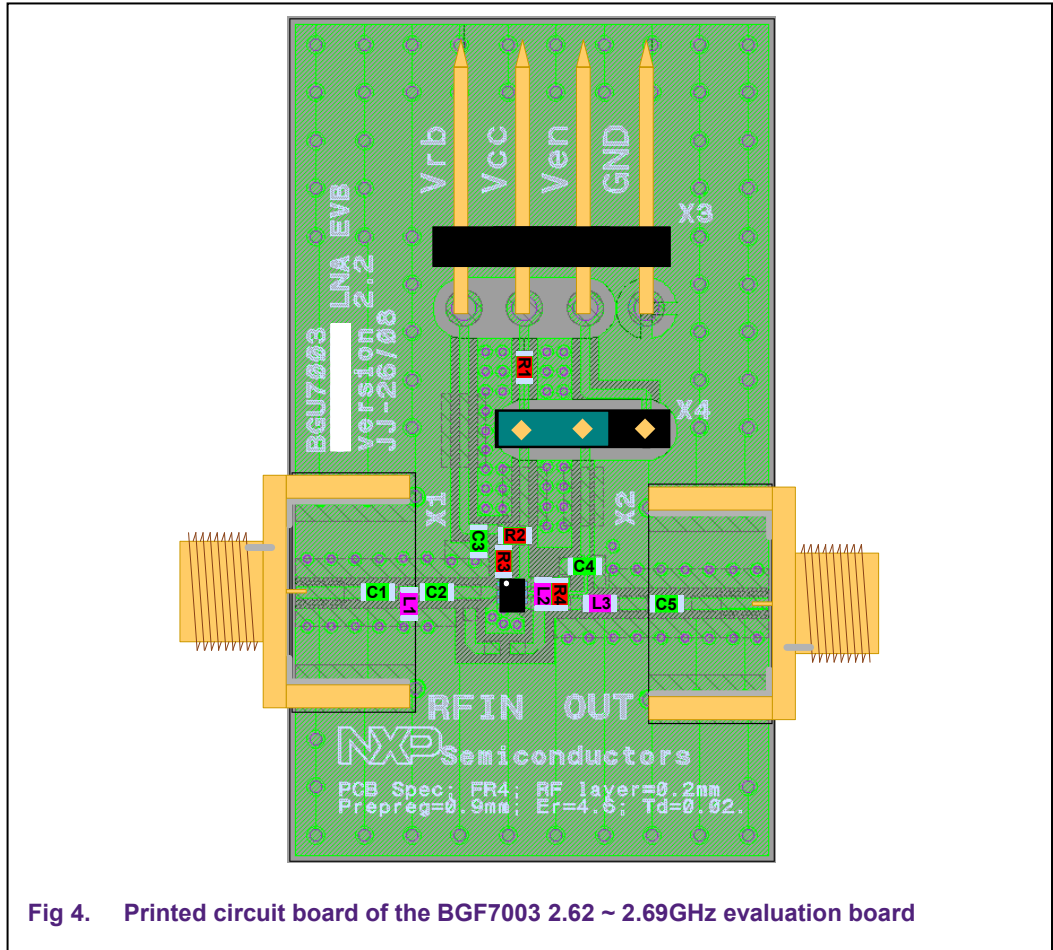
Printed circuit board of the BGF7003 2.62 ~ 2.69GHz evaluation board
